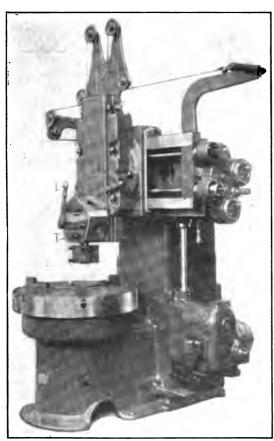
Small Boring and Turning Mill with Single Turret-head
